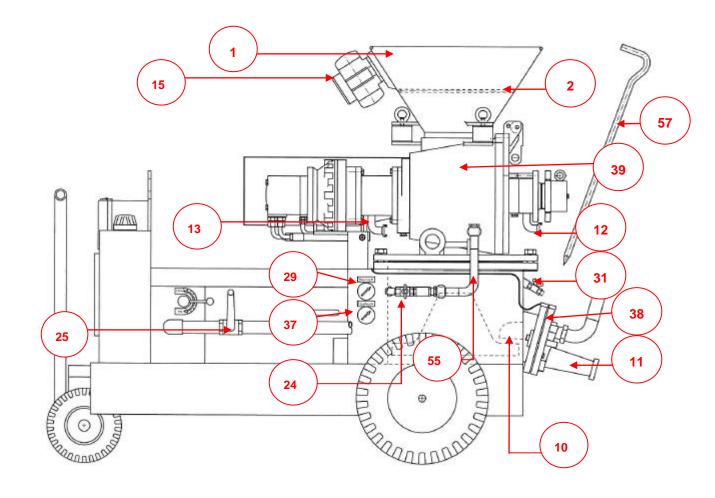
Overview drawing of the TSN / B1N Shotcrete Machine, side view
